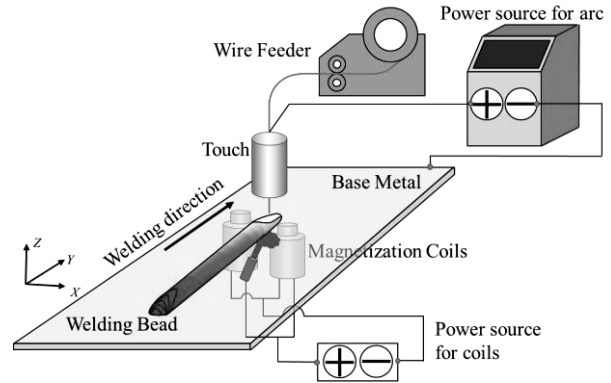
Experimental setup of GMA welding added with magnetization coils.
